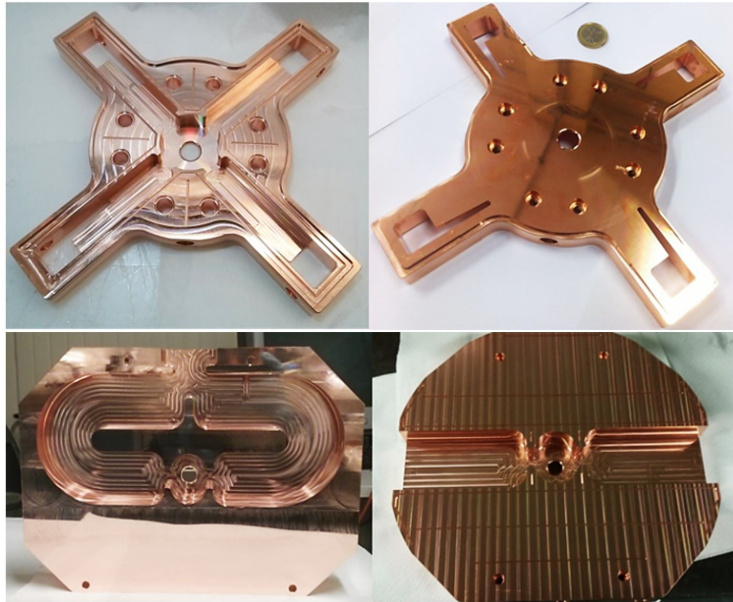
Picture of the machined cell and of the input and output couplers.
